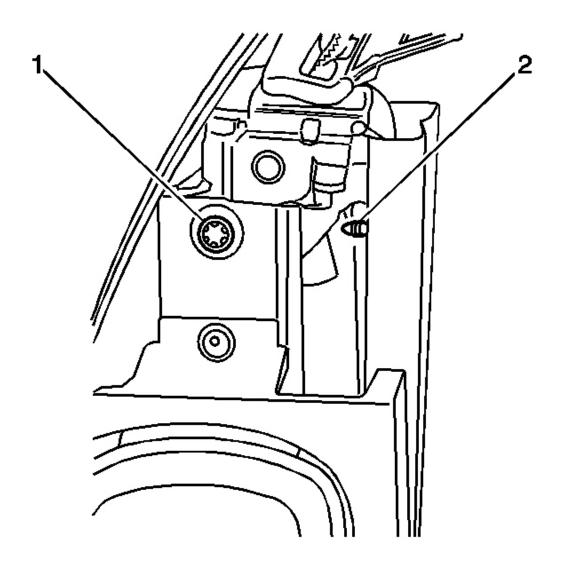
Removing/Installing Seat Belt Retractor Bracket Bolt Courtesy of GENERAL MOTORS CORP.
